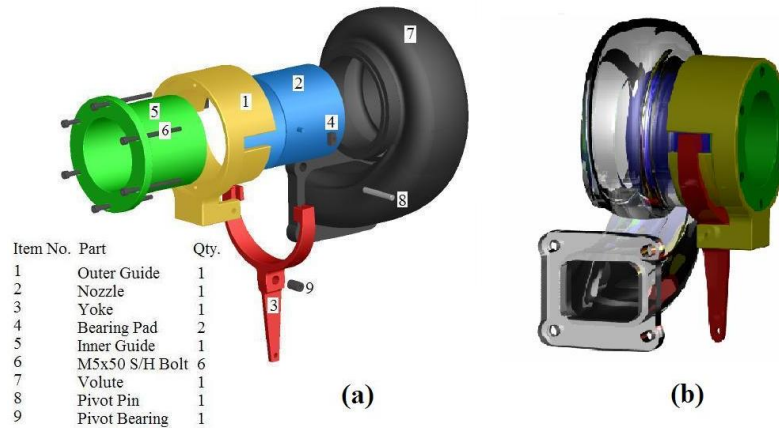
(a) Active control turbocharger exploded view and (b) assembly.
